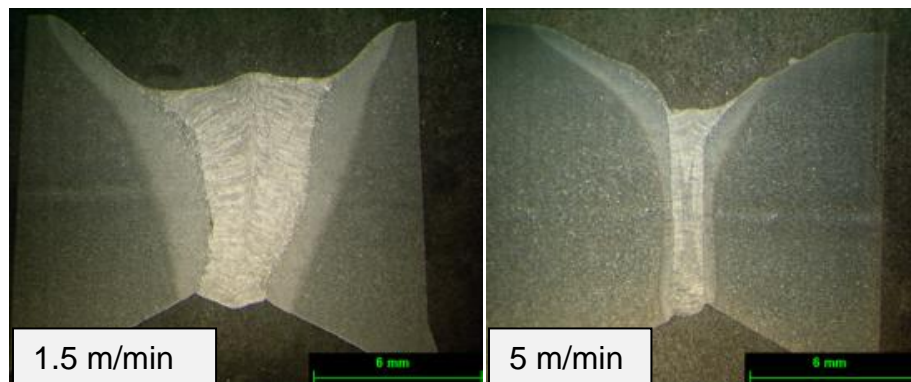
Influence of welding speed of hybrid laser/MIG welding on fit-up tolerance
